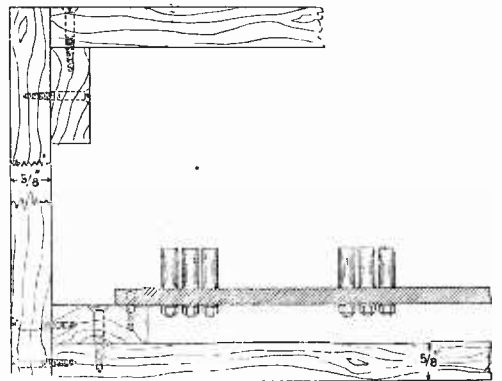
Method of fixing ebonite strip with valve sockets. If valve bases with terminals are used this strip will not be needed.
